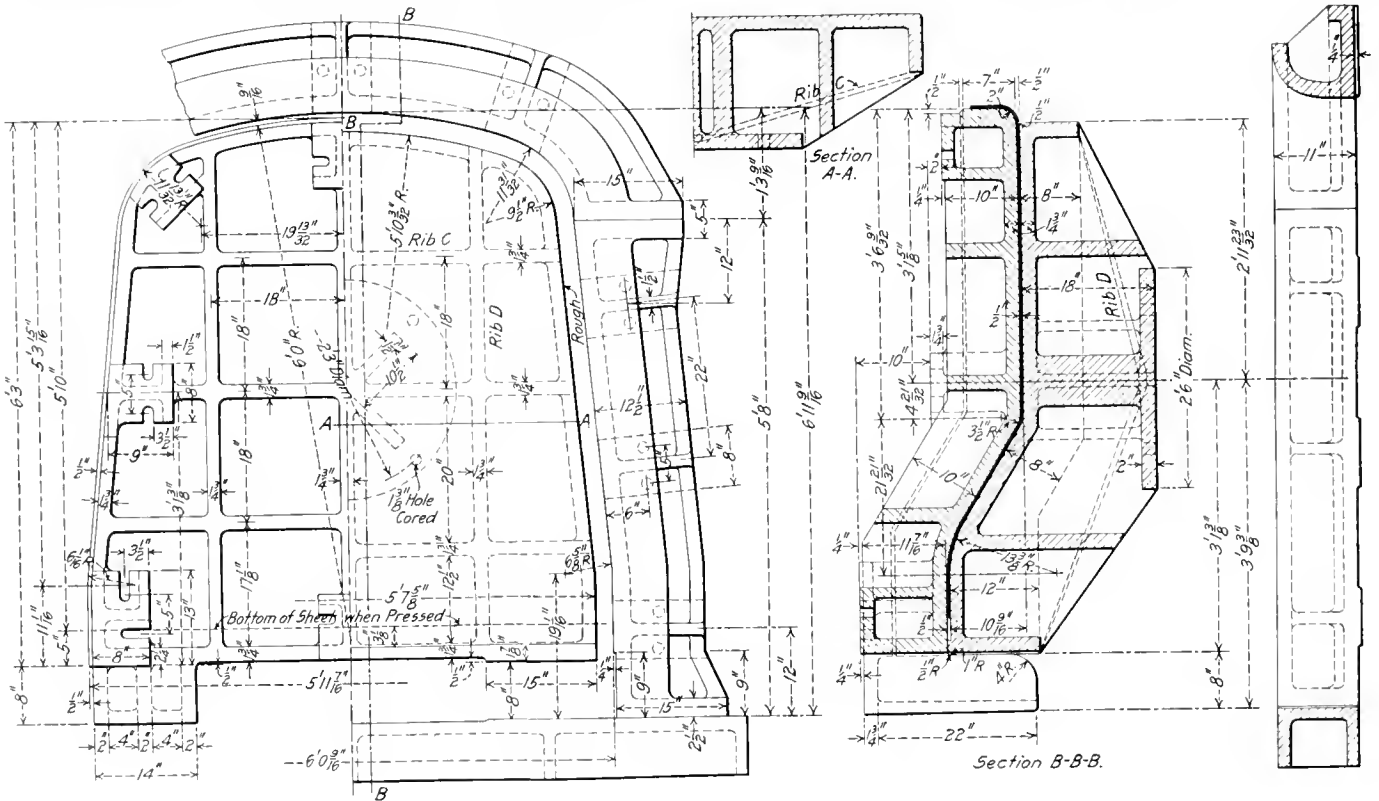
Formers for Flanging and Forming Offset Firebox Sheets.
